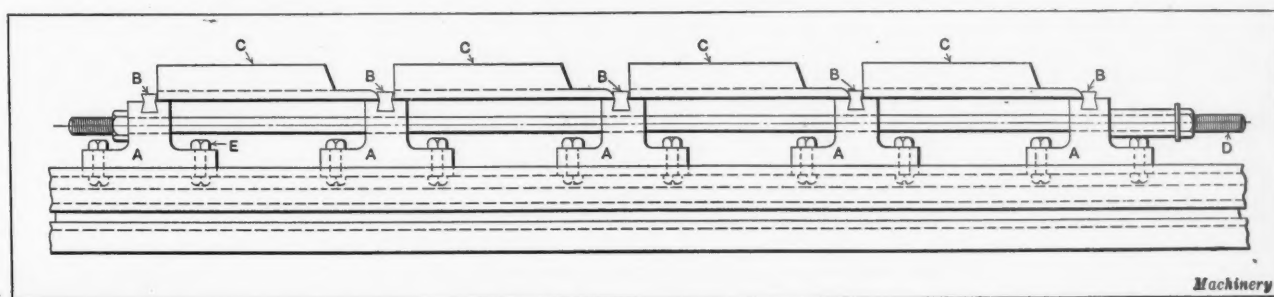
Chucks employed to hold Locomotive Shoes on Planer Bed
